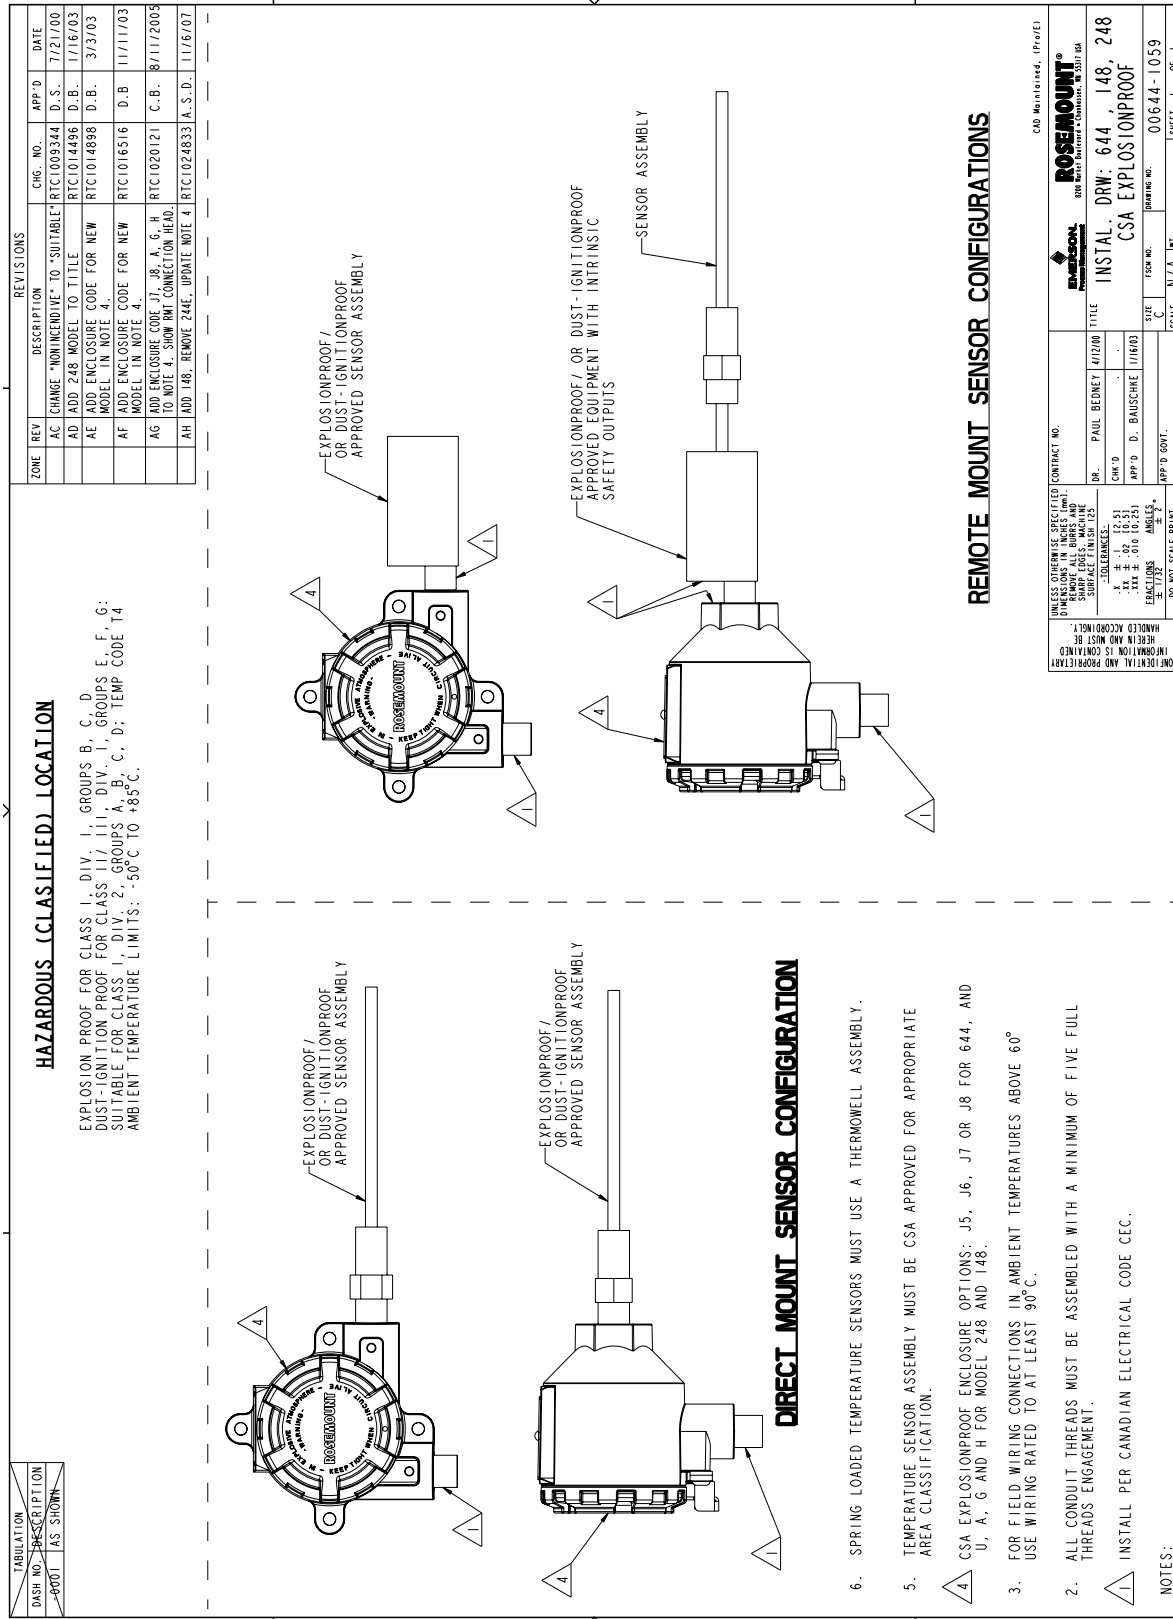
CSA Explosion-Proof Installation Drawing 00644-1059, Rev. AH
